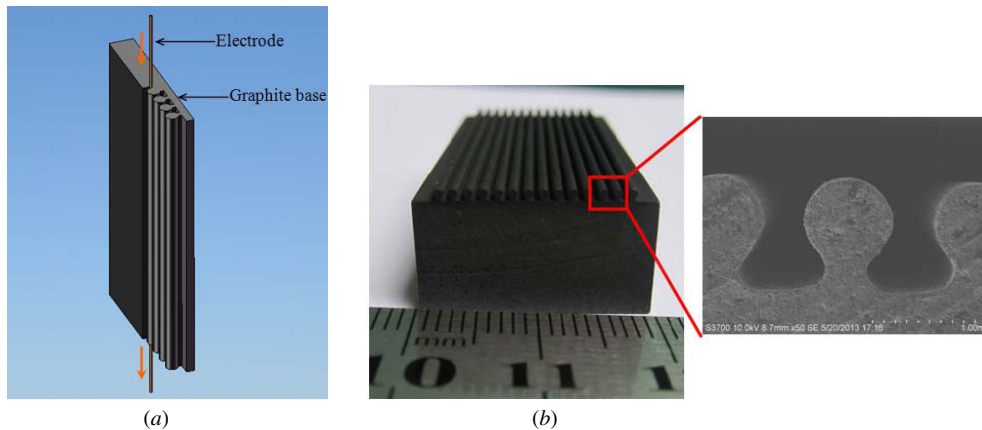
Fabrication of the graphite Ω -shaped mold. (a) EDM fabrication, (b) final Ω -shaped mold.
